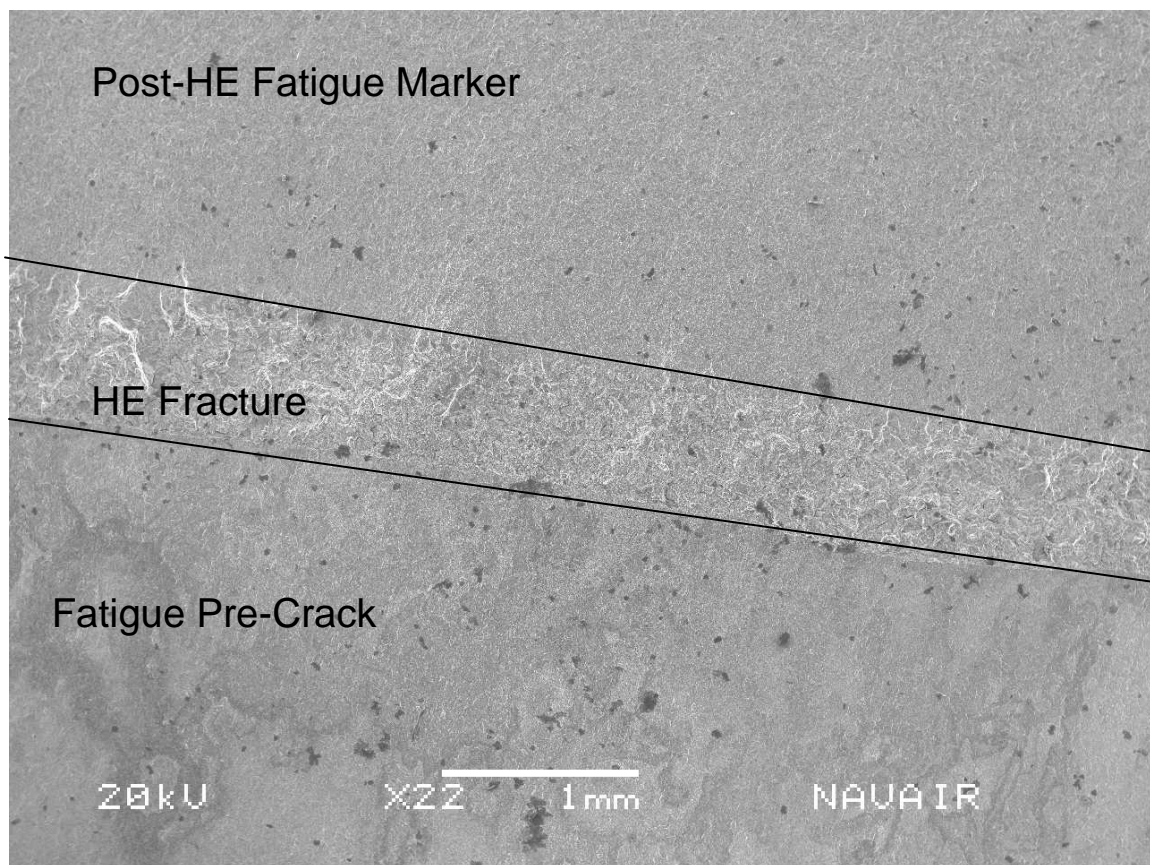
An Overview of the SA Sample Fracture Surface.
